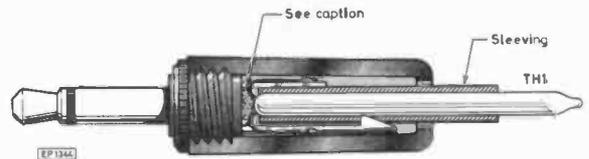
Cross-sectional view of temperature sensor assembly. A small piece of insulating material should be fitted at the base of the thermistor (TH1) to ensure that no short-circuits occur when the sensor is assembled
